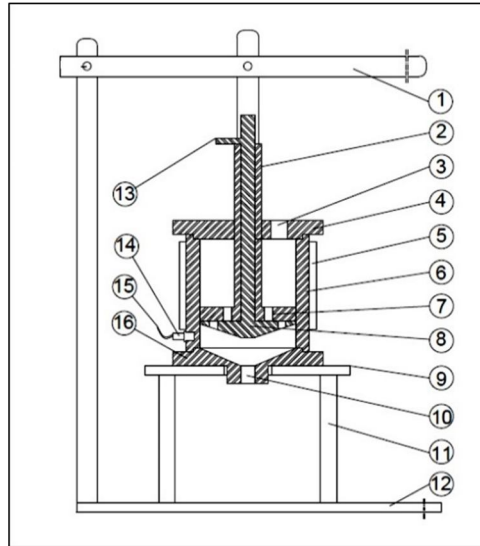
Section sketch of the developed Mechanical Mixer
